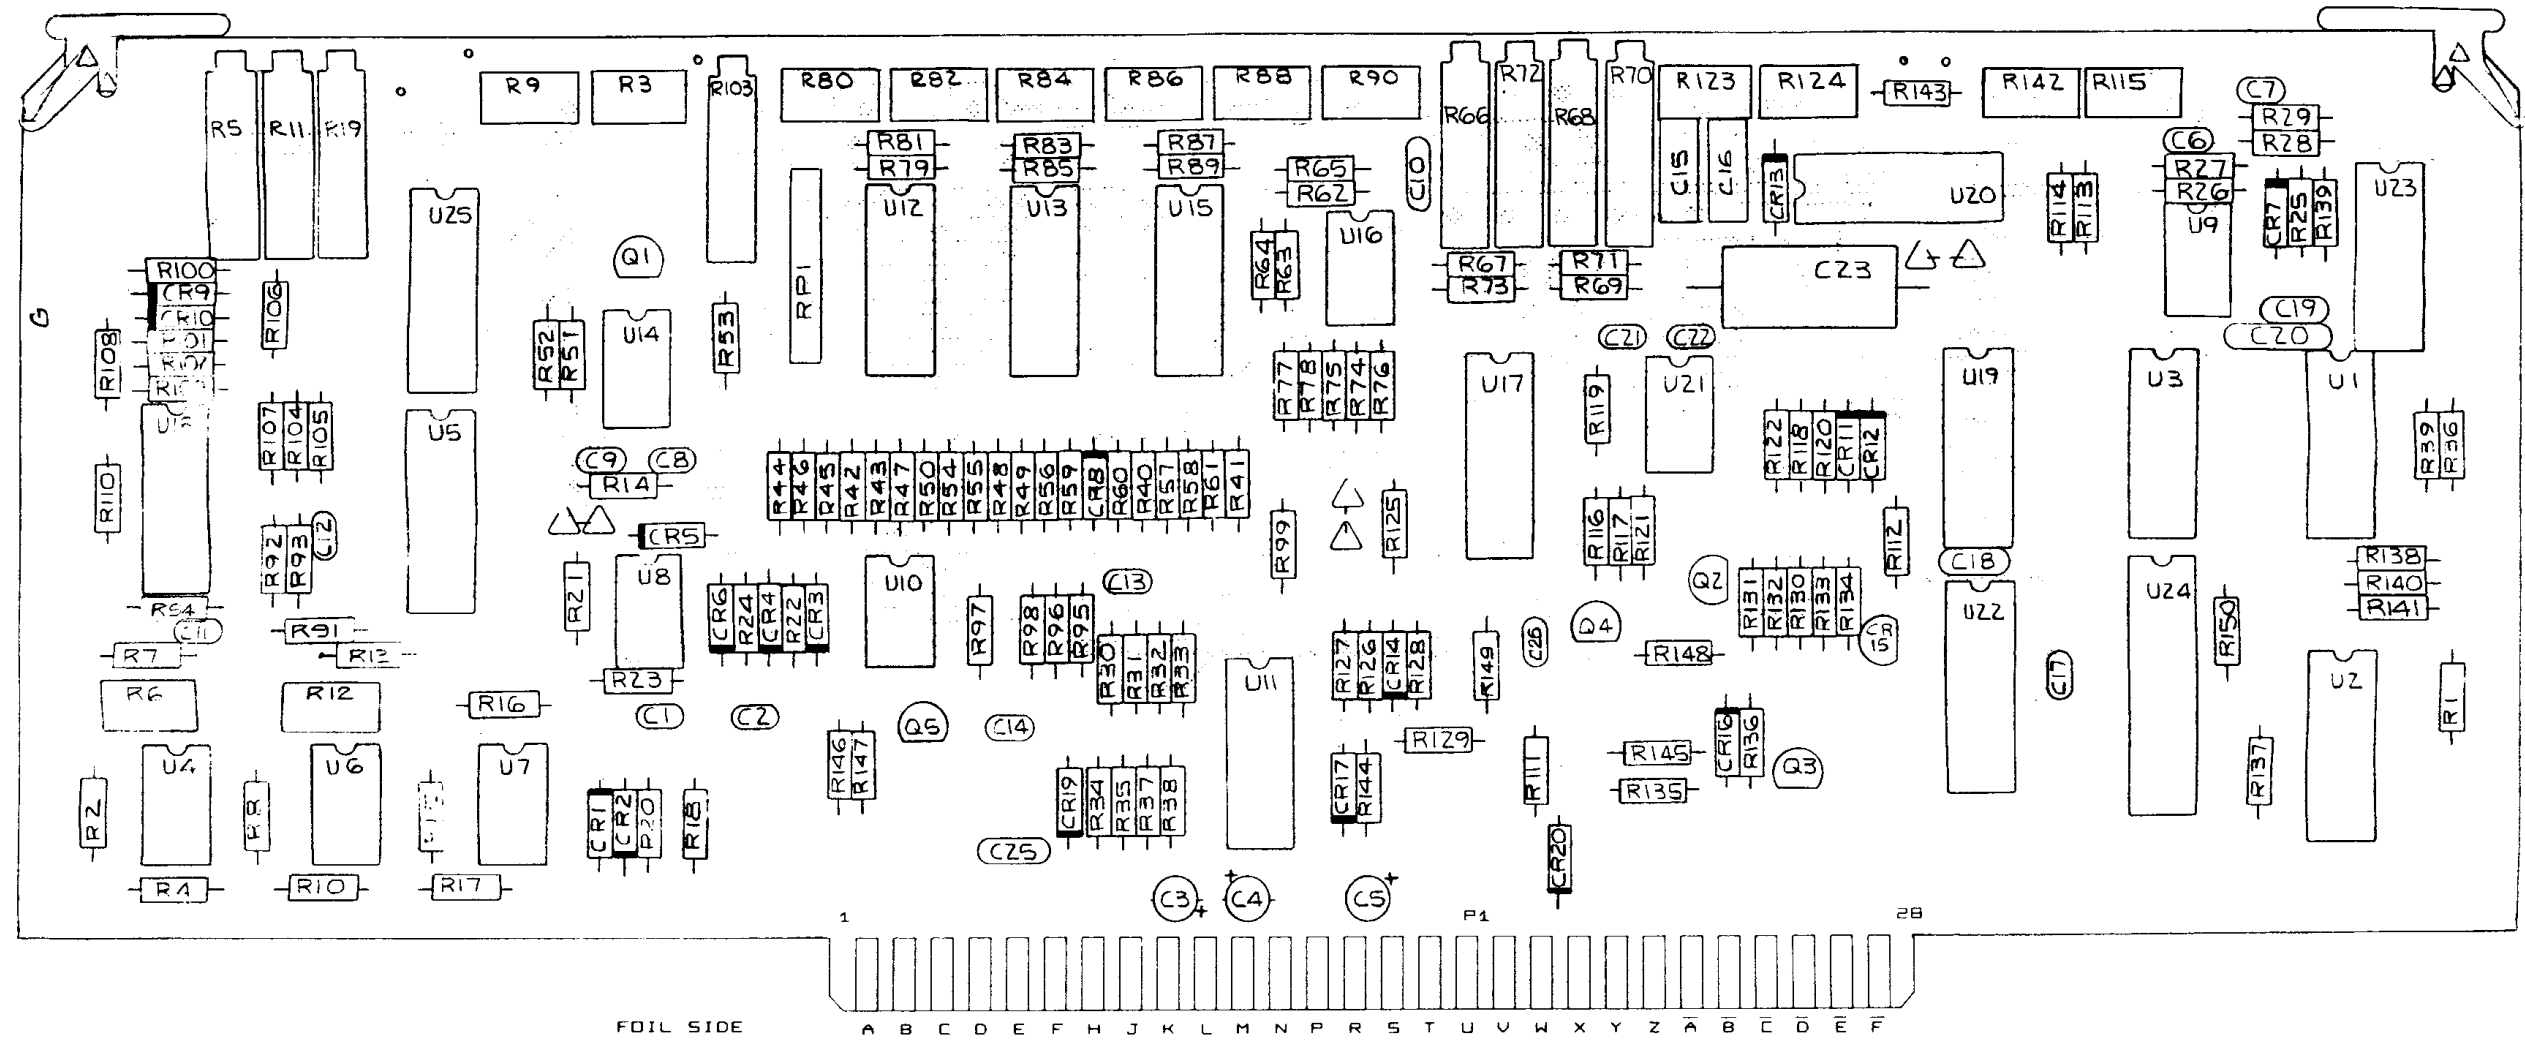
A1A4 ALC PCB Parts Locator, Ass'y D8004-3
